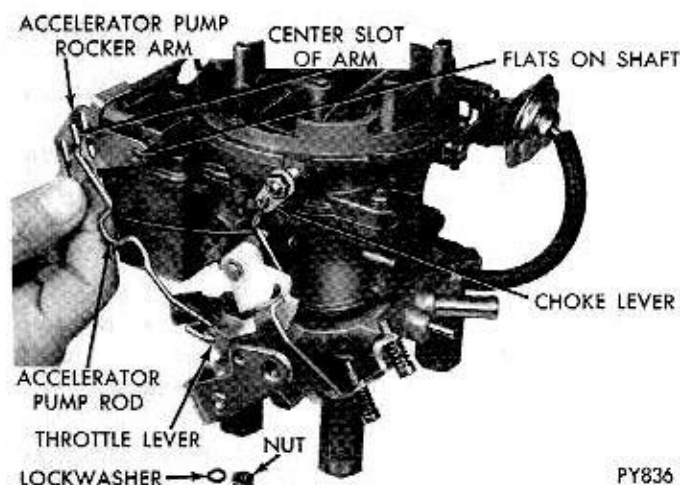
Removing or Installing Accelerator Pump Rocker Arm
